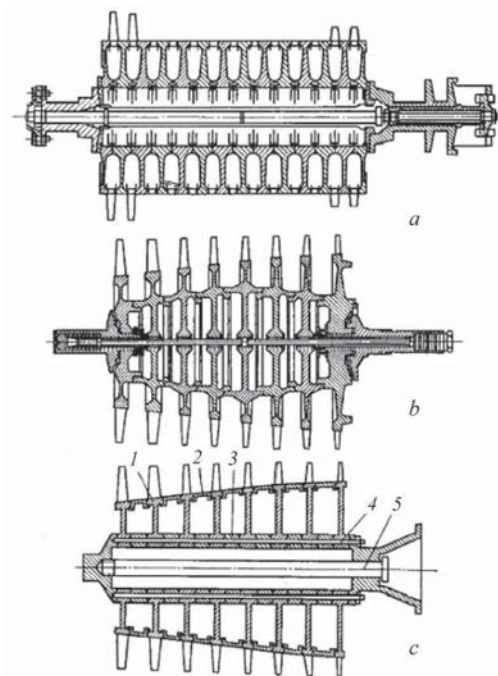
Disc-type and disc-drum type composite rotors of axial compressors with a central tie bolt [15]
